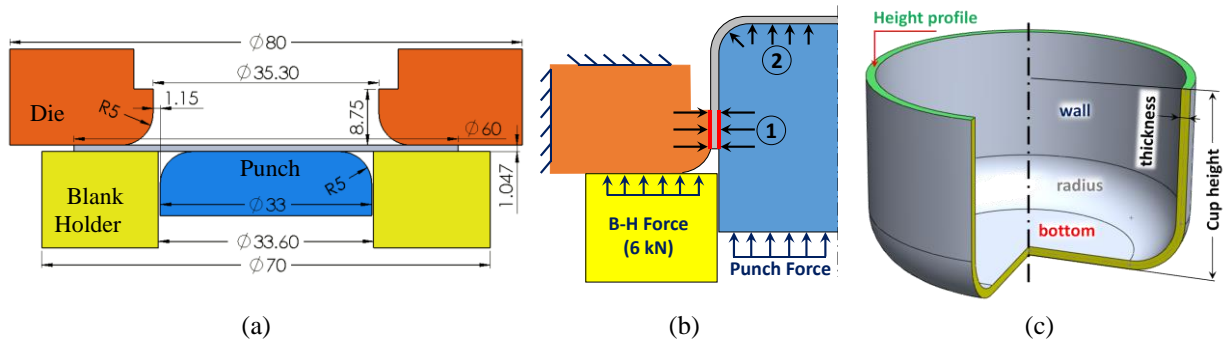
Deep drawing of a cylindrical cup: (a) Tools in initial position with dimensions; (b) Ironing phase; (c) Final cup geometry and its sections.
